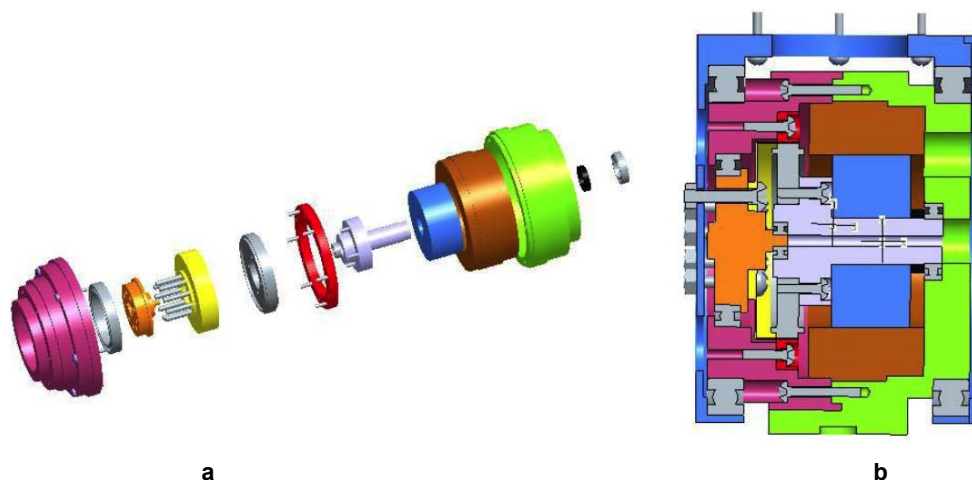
A robotic joint design: (a) explosion view; (b) cross-section.
